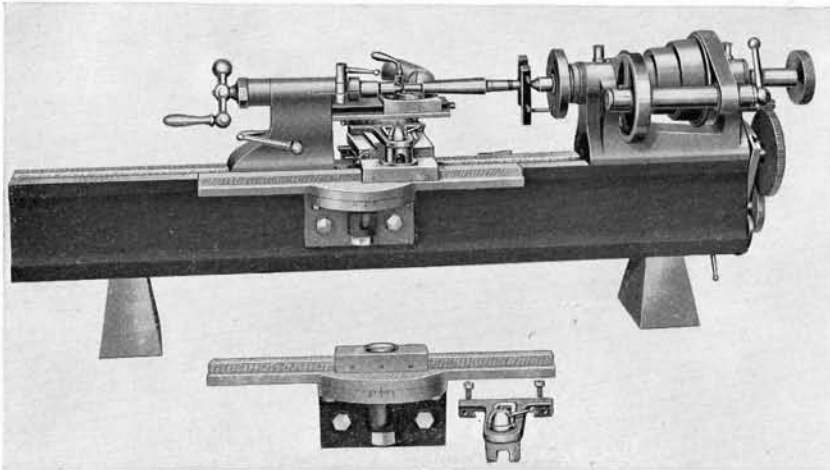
Rivett 608 (4 N.S.) lathe with Taper Attachment (rear view). Foreground view, attachment removed from lathe
